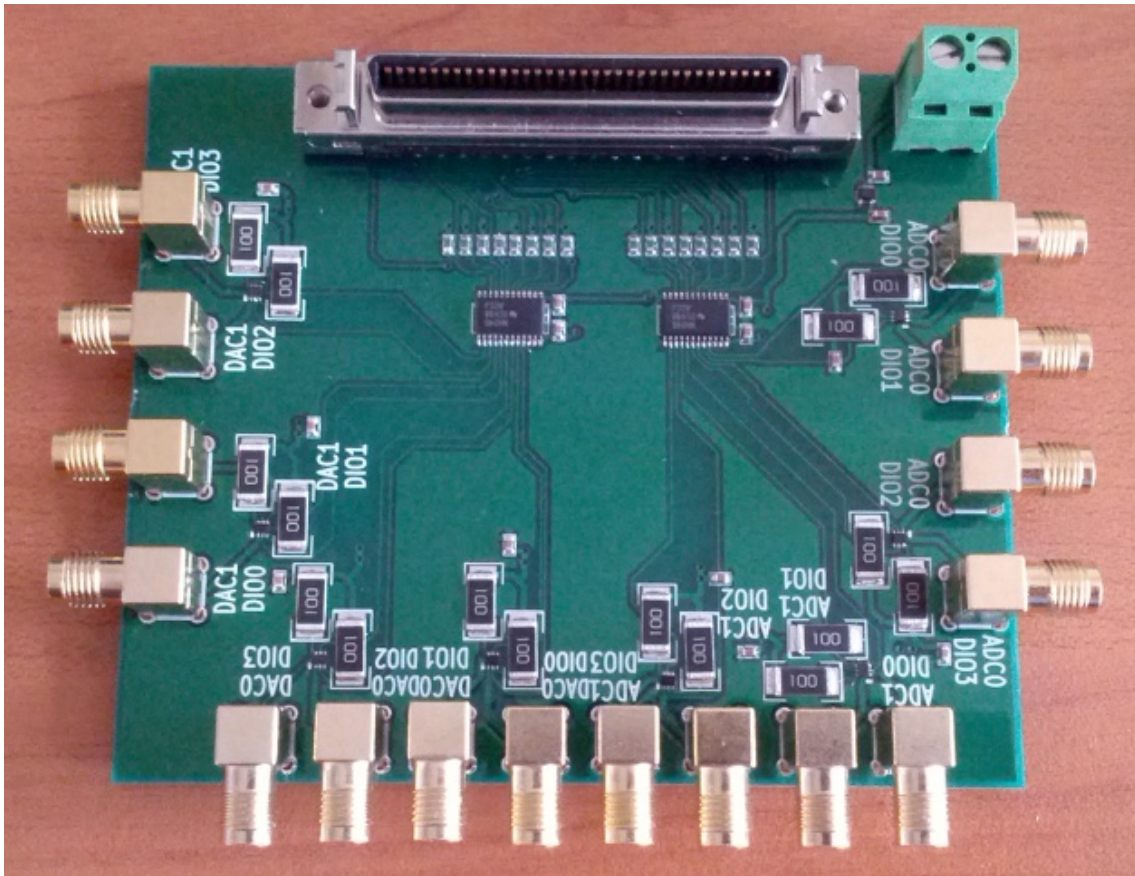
Photograph of revision 3 of the DIO breakout board. The large connector seen at the top is the primary MDR68 connector. The screw-terminal is the power input. All other connectors are SMA. PCB manufacture is APCircuits. Board assembly was performed by myself.
